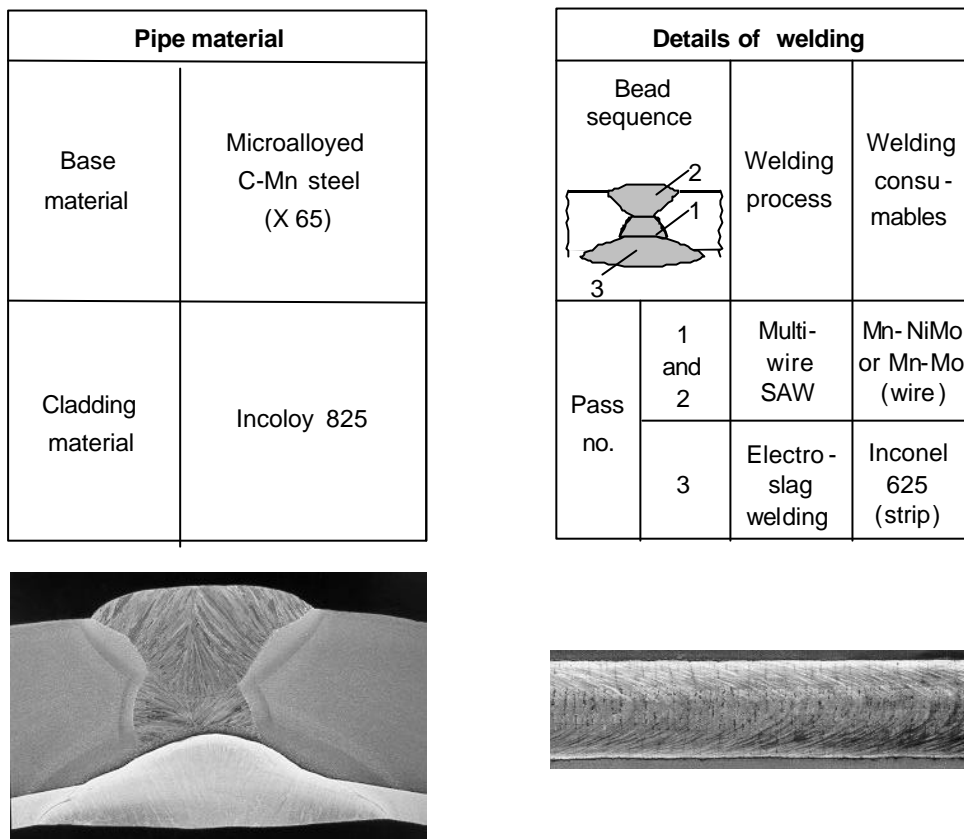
Welding consumables and typical build up of the longitudinal weld seam in clad linepipe (24" diam. with 20.5 mm wt).
